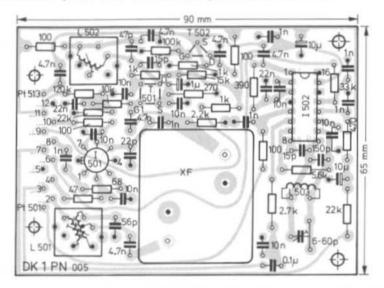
Printed circuit board DK 1 PN 005 with component locations
